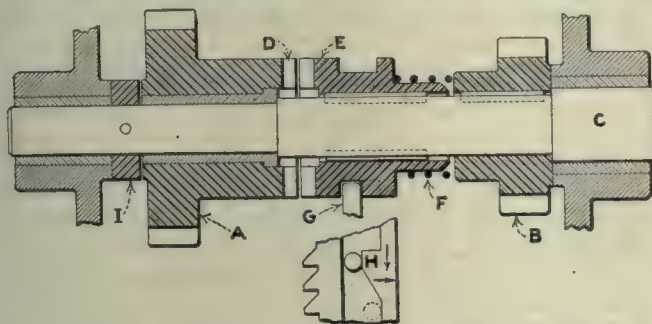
LAYOUT OF POWER PRESS CLUTCH
